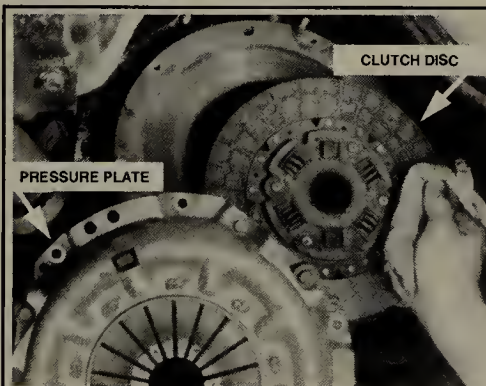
then carefully removing the clutch and pressure plate assembly from the flywheel
